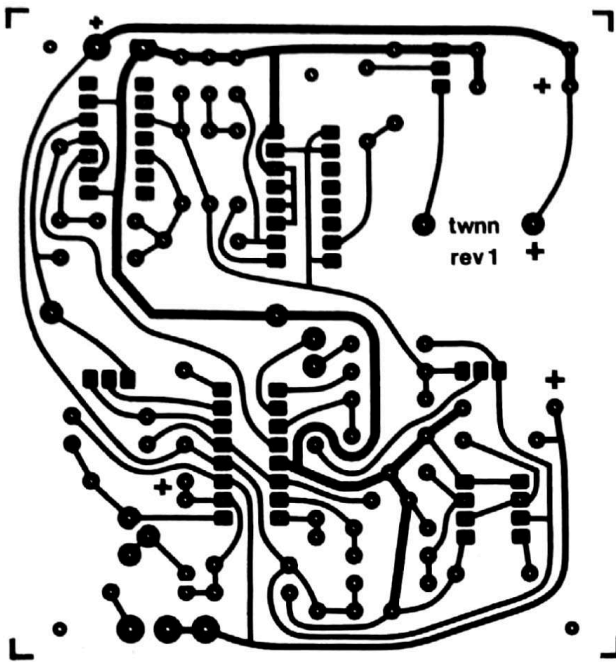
Foil pattern for a simple single-sided PC board. This “layer positive” was photographically reduced from a double-sized hand-taped Mylar pattern. The circuit board is 3.25×3.5 inches and has 4 ICs, 24 resistors, 11 capacitors, 5 diodes, 1 trimmer, and 1 piezo buzzer.
